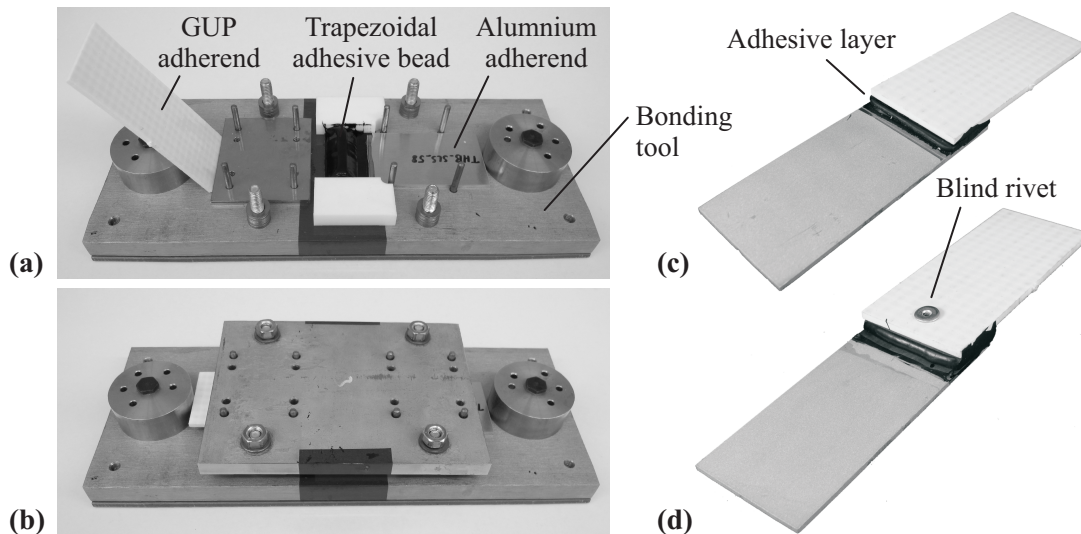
Manufacture of single-lap shear specimen: (a) adherends with applied adhesive bead, (b) closed bonding tool, (c) bonded specimen after curing, (d) completely bonded riveted specimen
